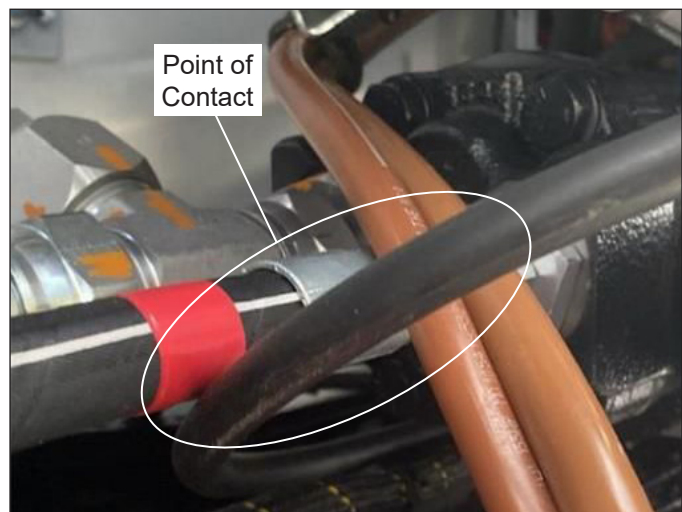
Example of Improper Routing (Fuel Lines and Shifter Cable Contacting Hydraulic Pump Assembly)
